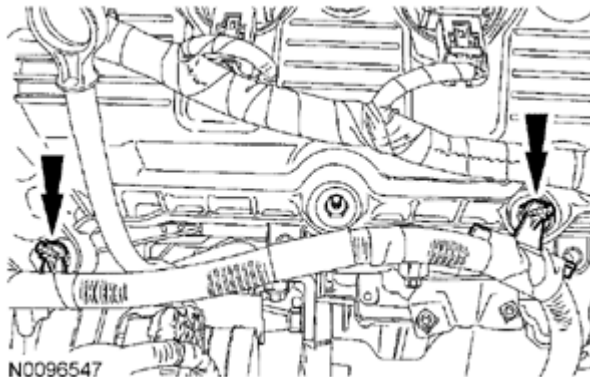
Locating B+ Wiring Harness Retainers Of Valve Cover Stud Bolts
